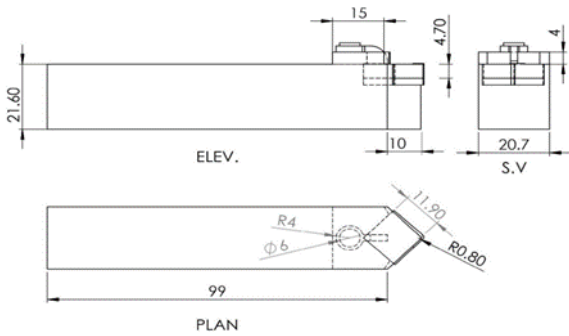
The dimensions of the cutting tool with insert and tool holder.
